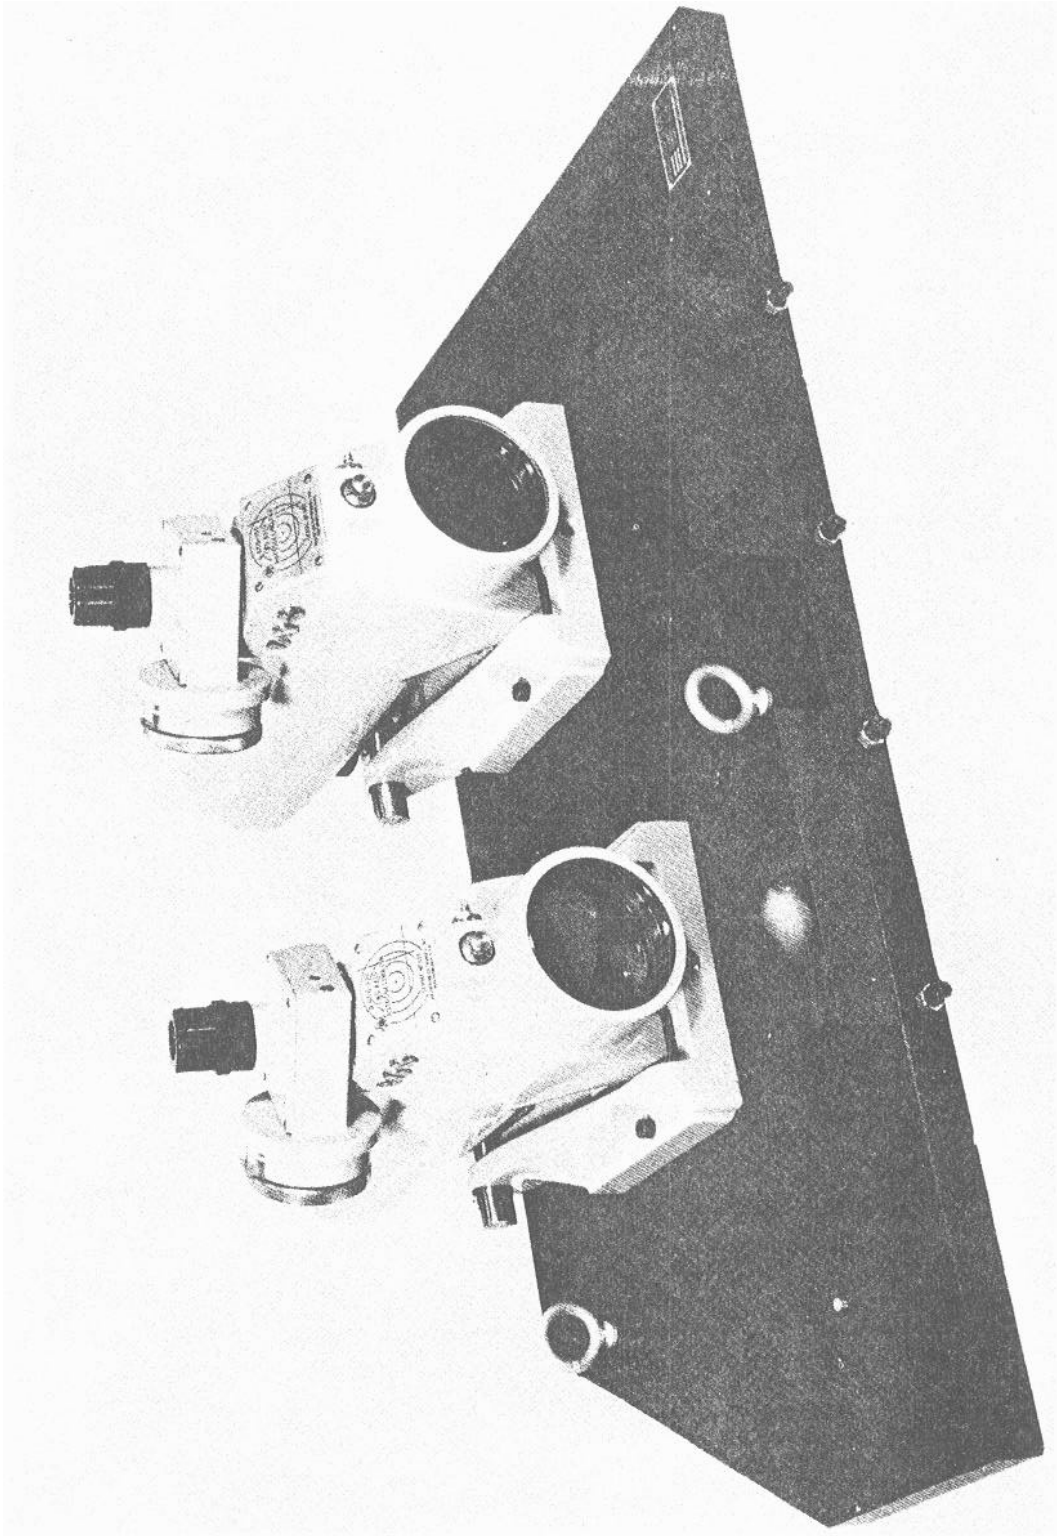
Forty-Five Degree Autocollimator Plate Assembly
